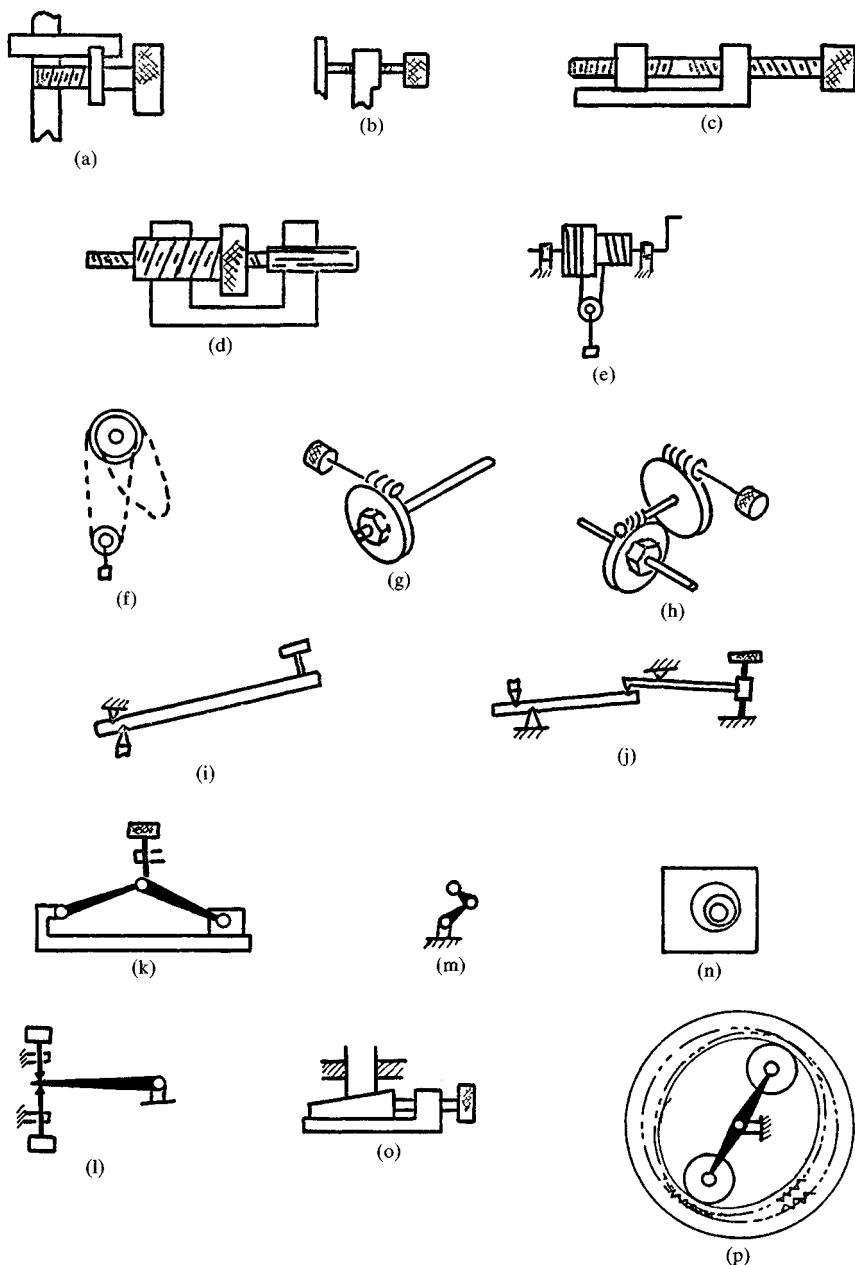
Fine adjustments I. Fine adjustments for stationary mechanisms are mechanisms that make a small change in the position of a mechanical member. (a), (b) Screw adjustments; (c), (d) differential screws; (e) Chinese windlass; (f) differential hoist; (g) worm gear and screw; (h) worm gears in series; (i) lever; (j) levers in series; (k) toggle mechanism; (l) screws to adjust angular position; (m), (n) eccentric cranks; (o) wedges; (p) harmonic drive.
